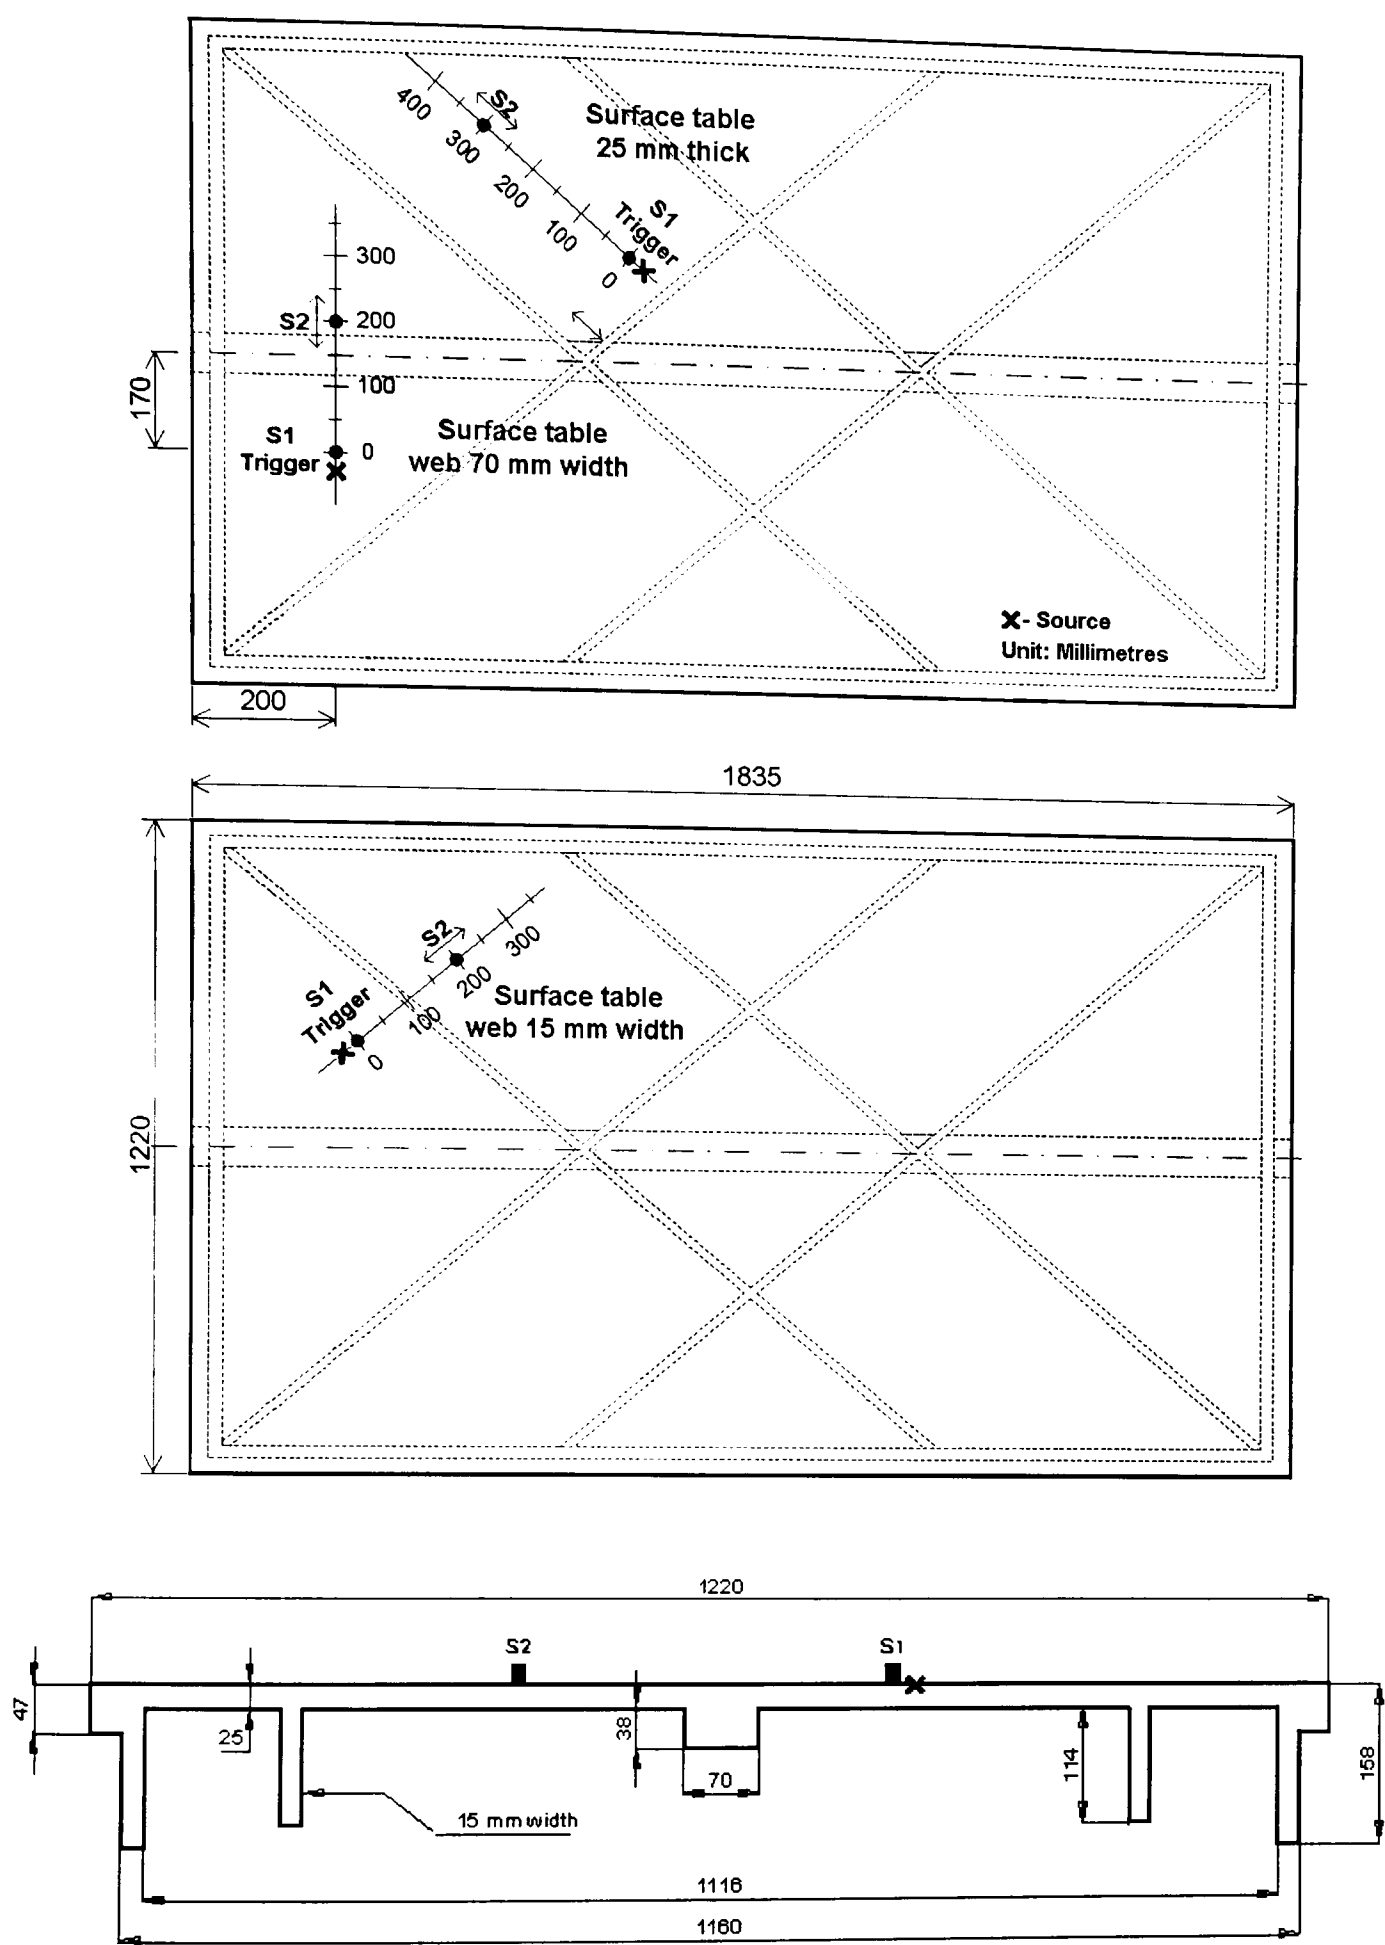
Drawings and dimensions of the engine base and source-sensor positions
